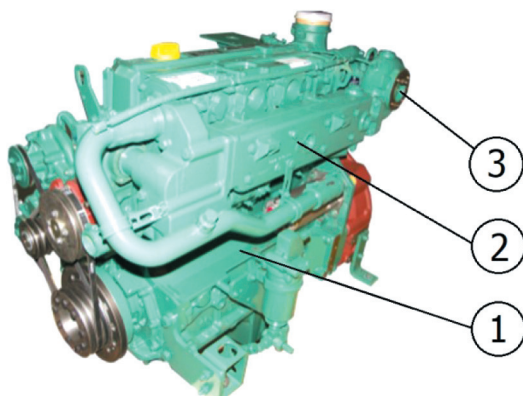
Sample design of engine unit intended to operate in atmosphere threatened by methane and/or flammable dust explosion hazard meeting Stage I/II requirements: 1 – diesel engine, 2 – liquid-cooled outlet exhaust gases collector, 3 – liquid-cooled turbocharger [5]
